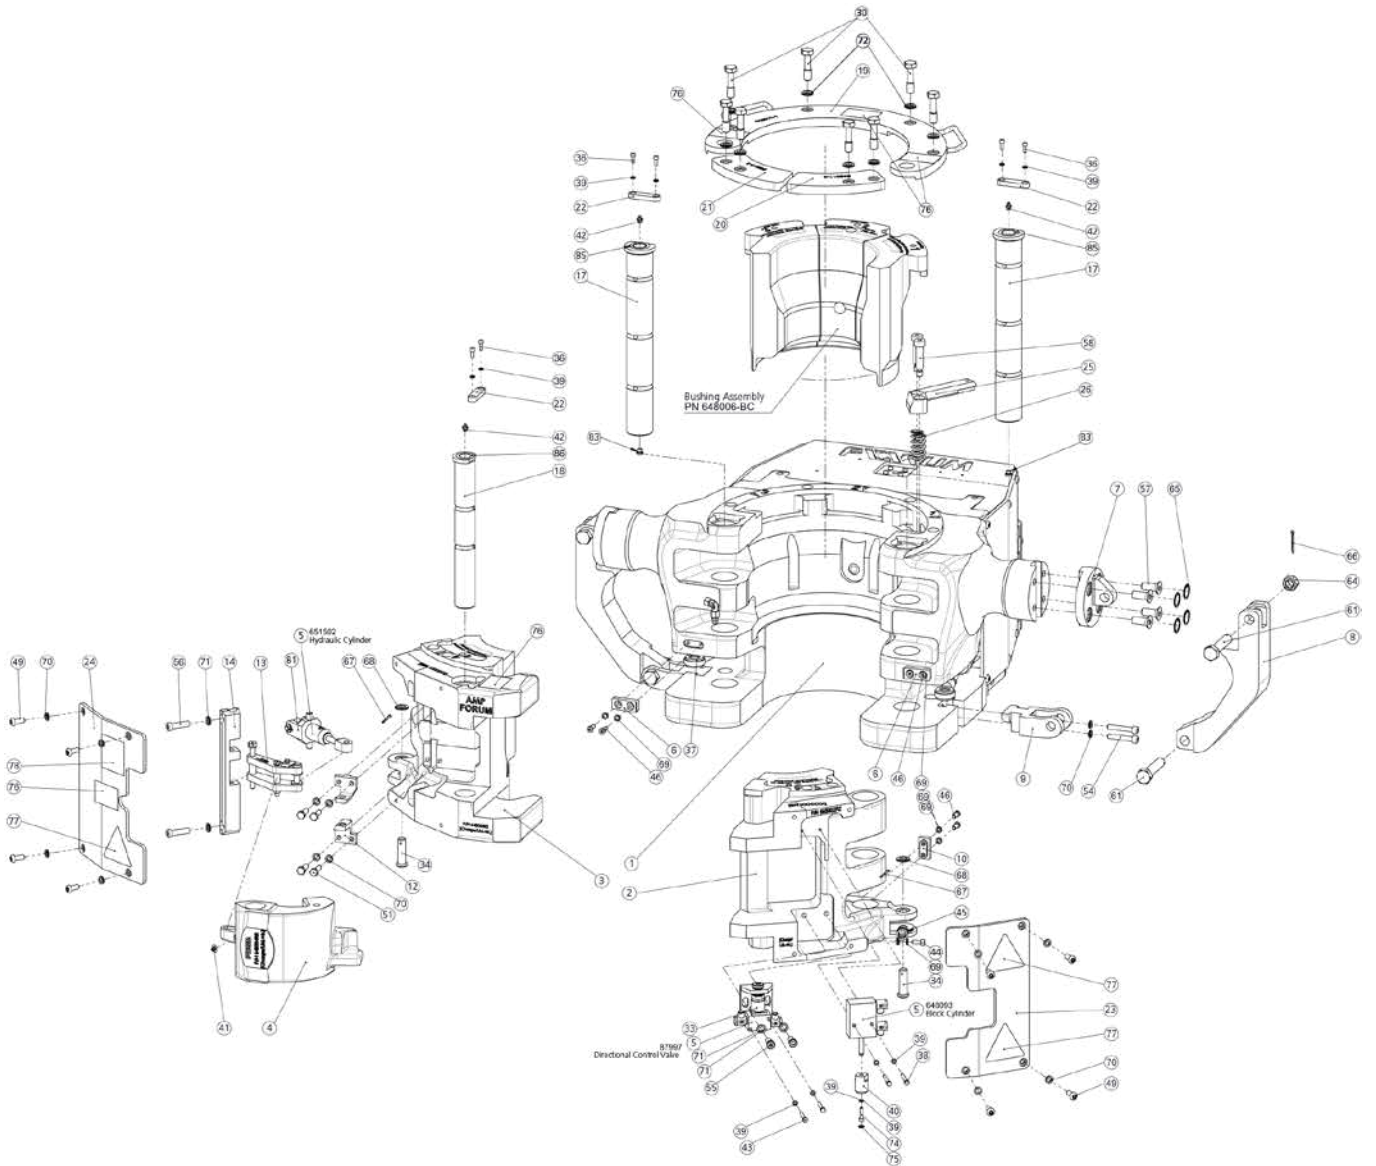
638100-Y-375 (AMP®-375/1) - Drawing I
